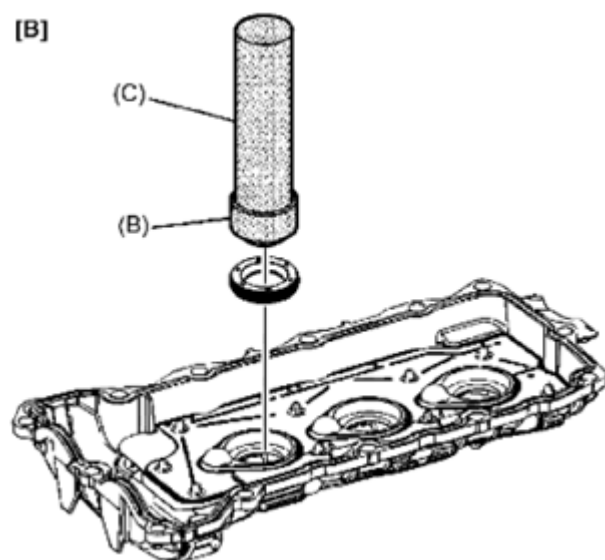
Identifying Spark Plug Hole Gasket
